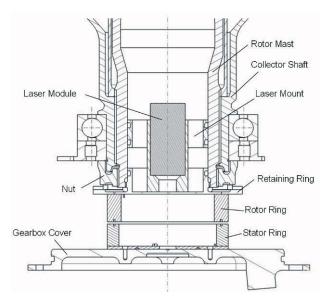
Sectional view of the EC 135 transmission including laser module installed in laser mount.
